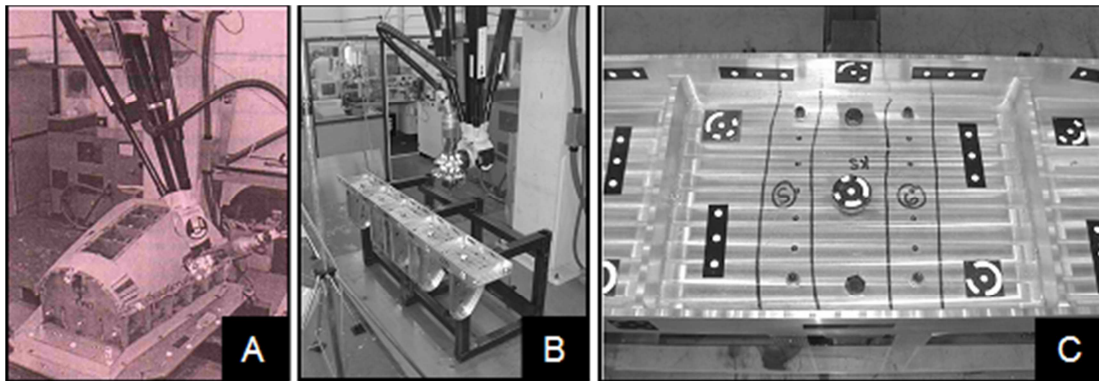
The TI² system installed at University of Nottingham, UK. A) Drilling operation on a Lear 45 business jet forward fuselage [27]; B) Fixtureless test setup for wing rib and spar milling and drilling [28]; C) Holes drilled in spar, showing details of the photogrammetry targets [28].
